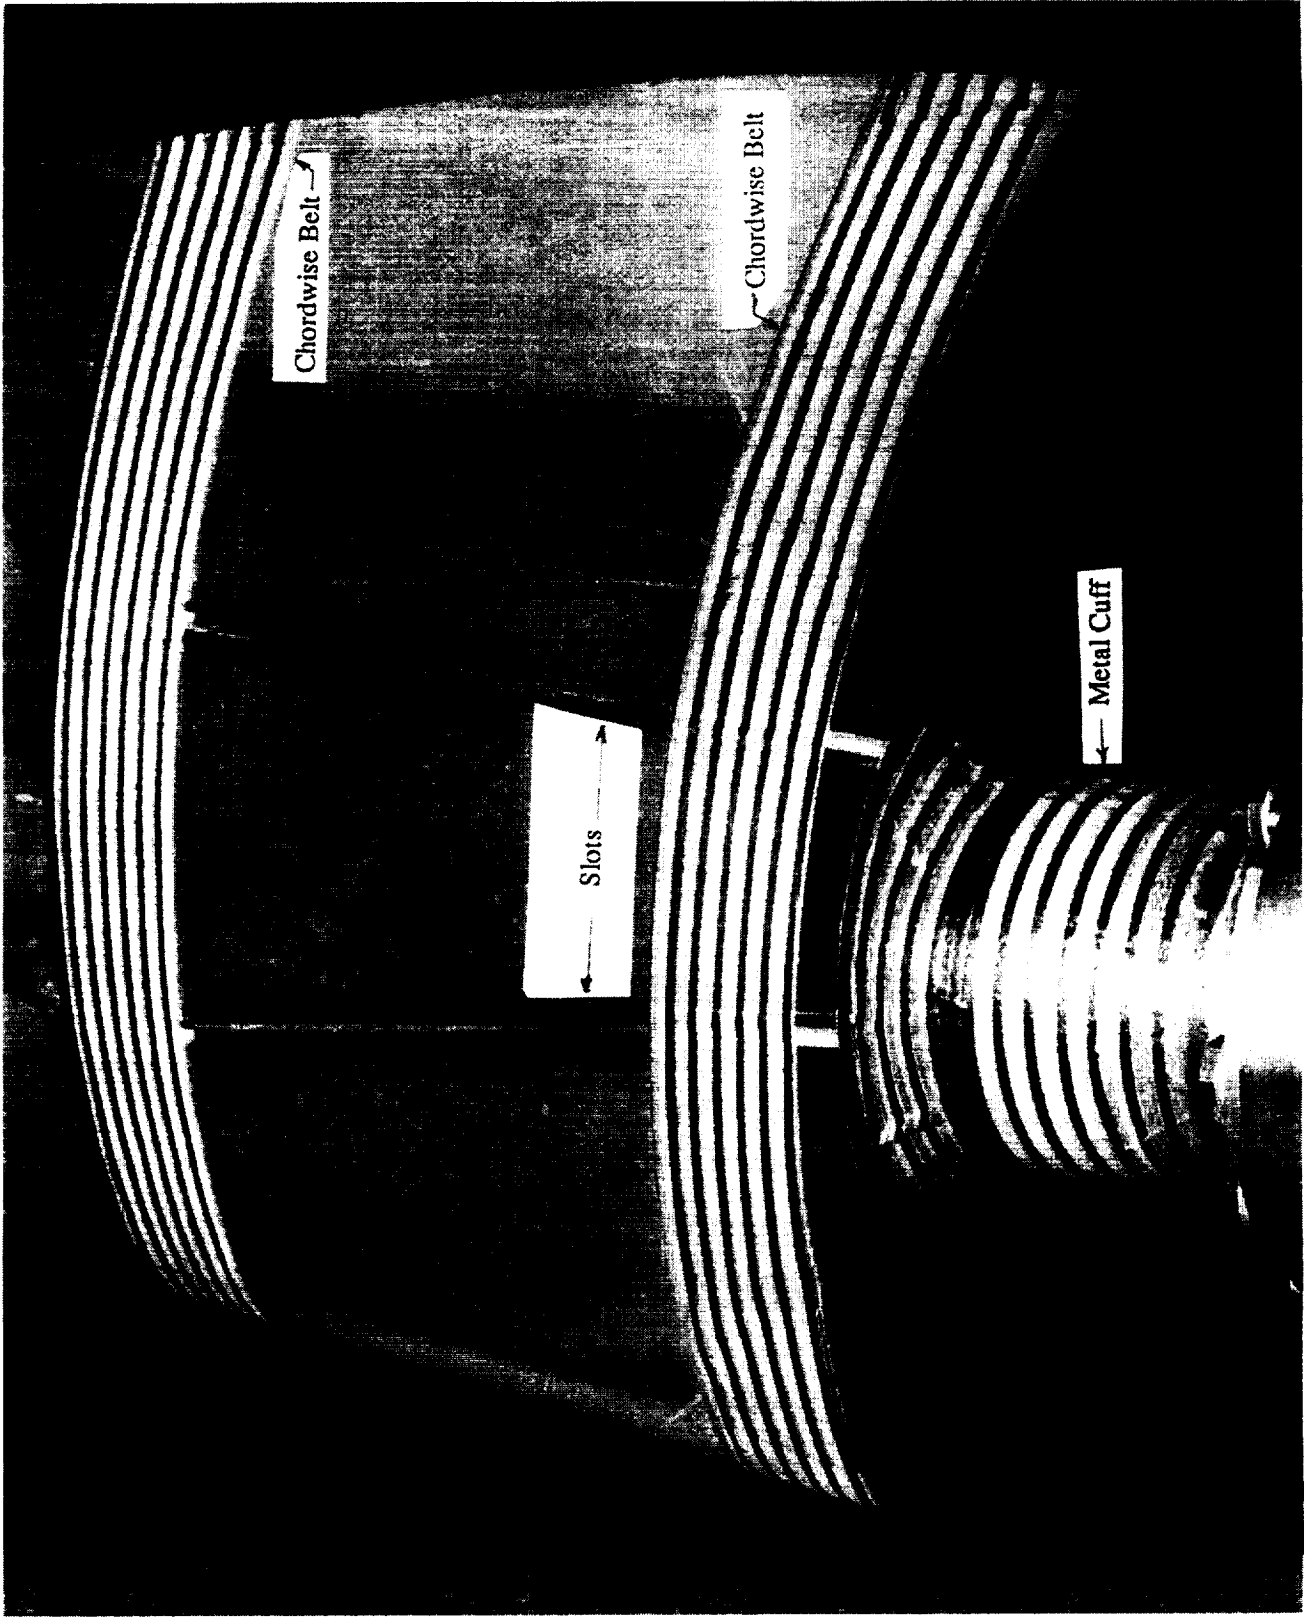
Photo of repaired blade upper surface illustrating overwrap of blade and metal cuff with chordwise.
